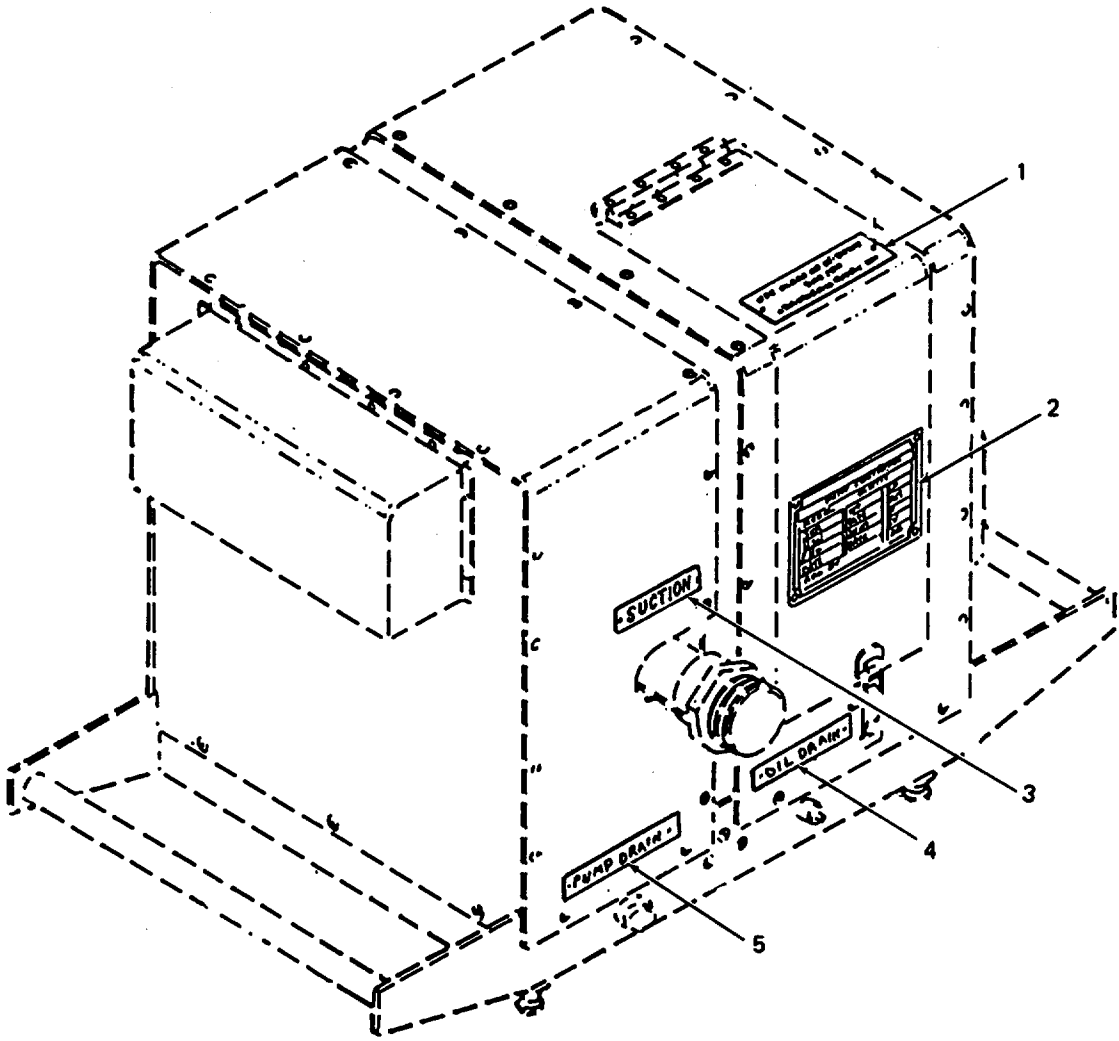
Diesel-Driven Centrifugal Pump Assembly, Model PAD 125A
